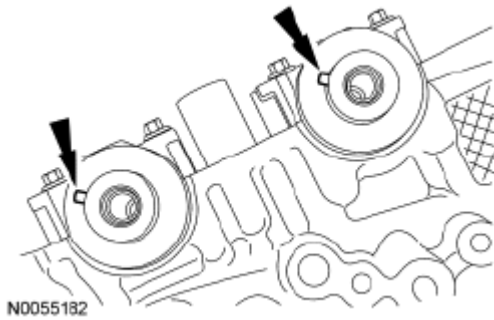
Positioning Camshafts Onto RH Cylinder Head In Neutral Position
